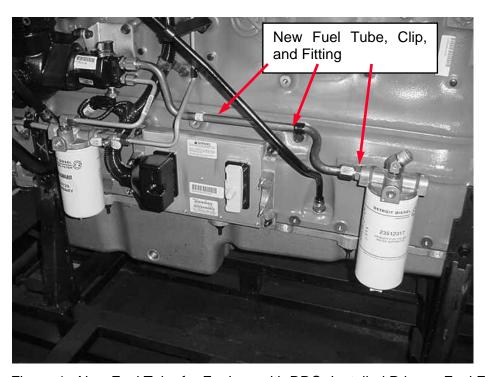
New Fuel Tube for Engines with DDC- Installed Primary Fuel Filter
